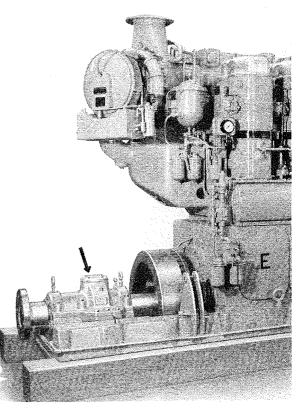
Standard two-shoe bearing on extension of engine base. Courtesy Enterprise Div., General Metals Corp.
